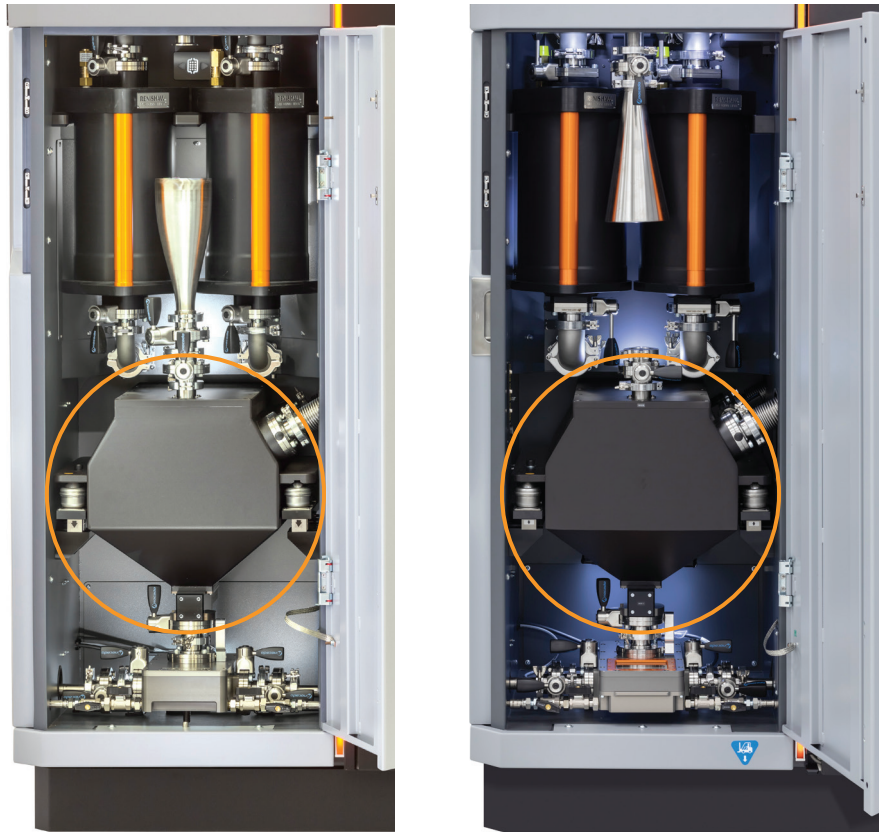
Renishaw hopper trolley – front view (left) and rear view (right)
